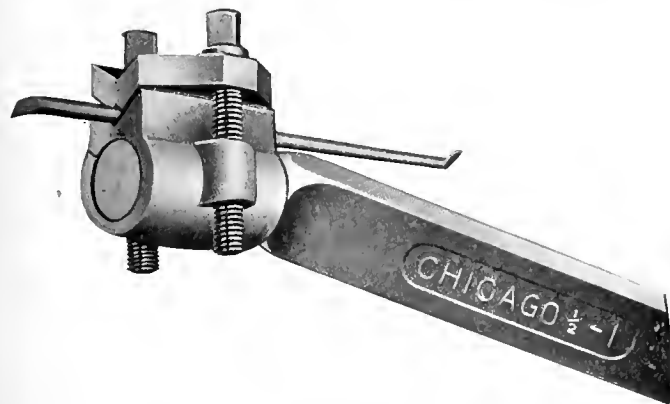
Holder in Use with Forged Boring Tool of Small Diameter.
